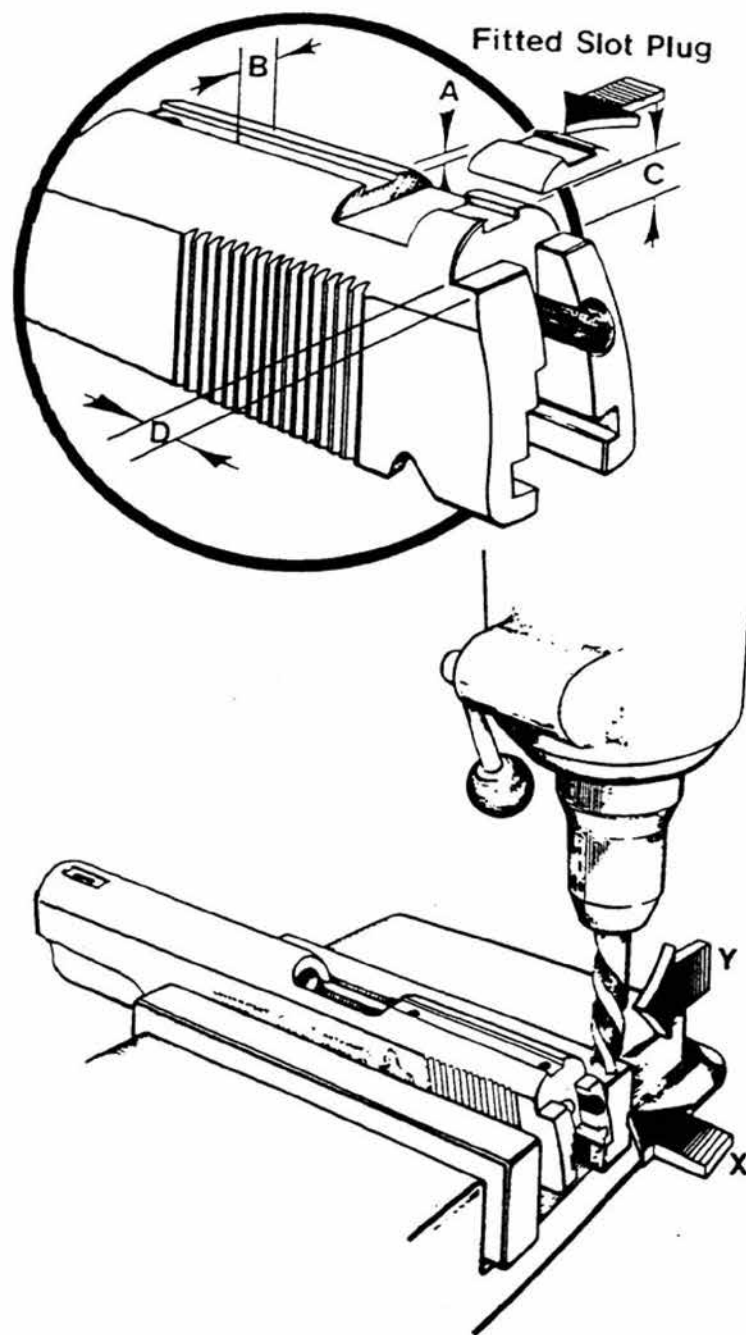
A milling machine with a $\frac{1}{4}$ in. carbide end mill is ideal for sight modification.
